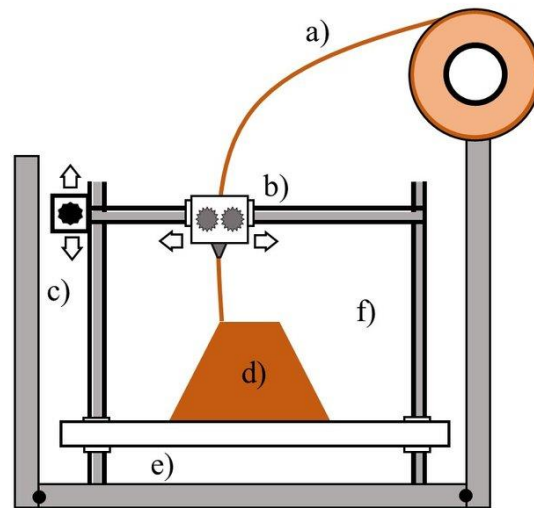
Simple schematic of a 3D printer utilizing an extrusion-based technique
